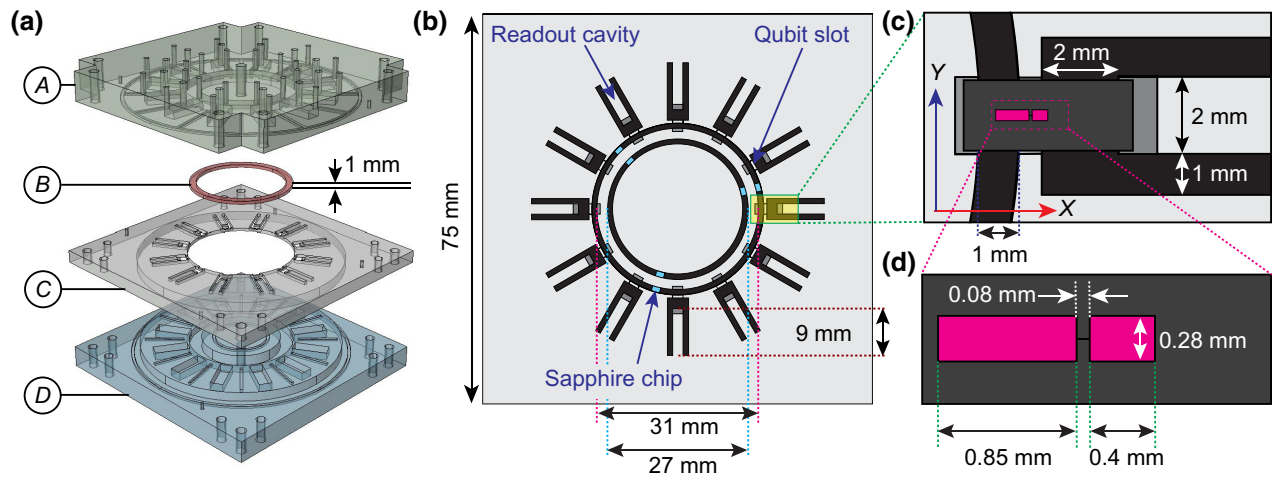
Design and assembly of the 3D ring resonator setup. (a) The device is machined in four parts labeled (A)–(D). Parts (A) and (D) contain the top and bottom parts, respectively, of the ring resonator and the readout cavities. Part (B) is the central conductor of the ring resonator. Part (C) contains the central conductor of the readout cavities and the slots for placing the qubits. The SMA connectors (not shown) for the readout cavities are attached to part (A) from the top and bring in the readout and qubit excitation. (b) Top view of the ring-resonator setup after assembling parts (B)–(D). The dimensions of the bus and readout cavities are shown. Three sapphire chips (shown in cyan) hold the central conductor of the bus resonator in position. (c) Magnified view of a qubit chip placed in its slot shared between the bus and readout cavities. (d) Magnified view of the transmon qubit design showing the capacitor pad dimensions used in the experiment.
